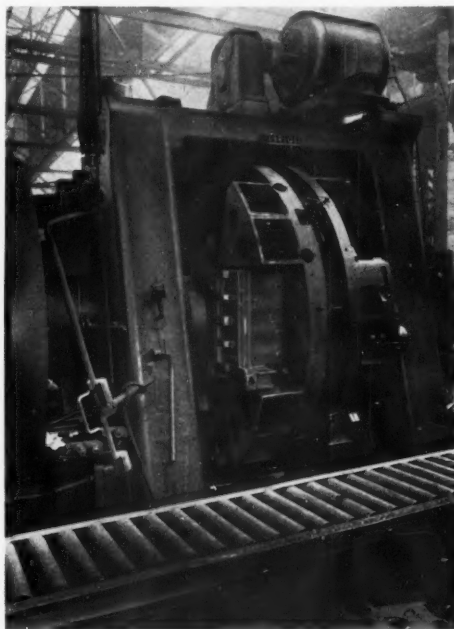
Six-spindle Ingersoll drum mill for machining the sump and head faces of the Fordson Major cylinder block
